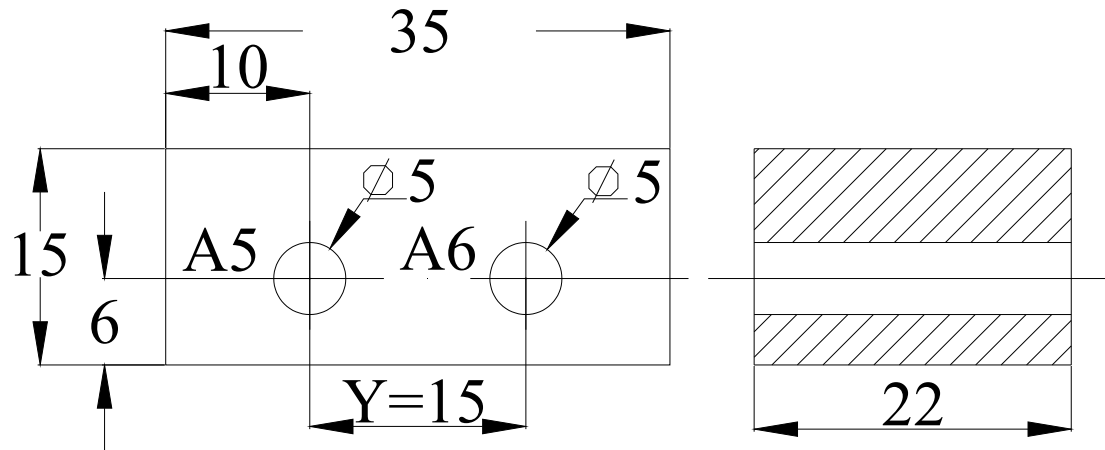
Drilling two holes of  $\varnothing 5$  (mm)
